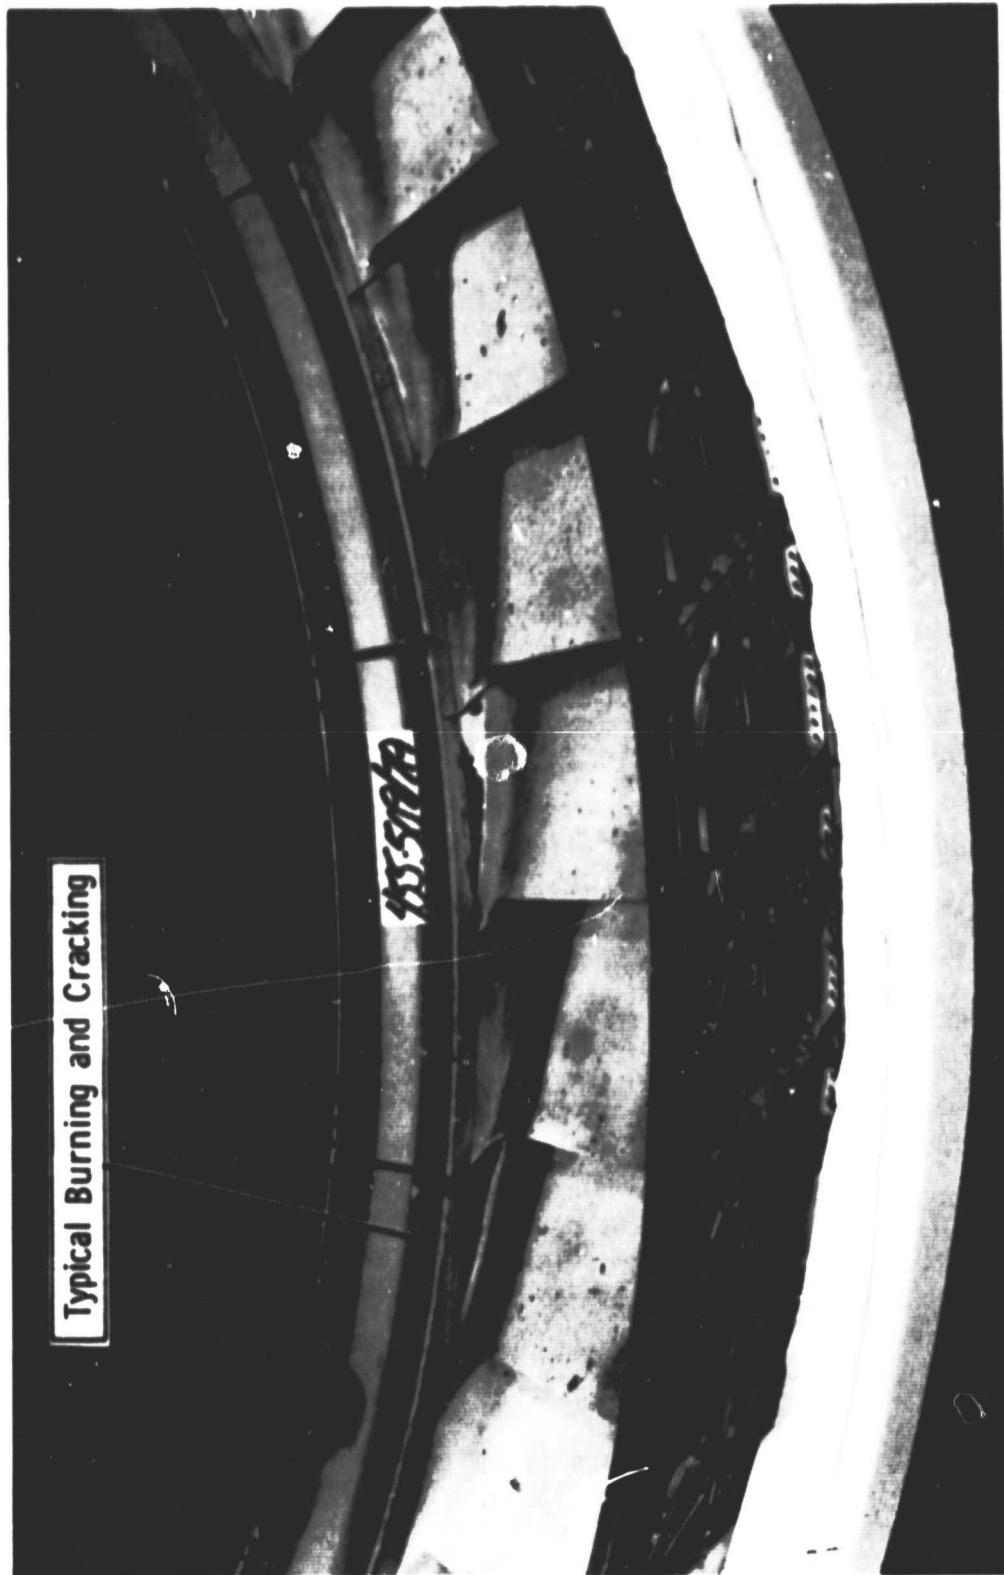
Aft View of Stage 1 Nozzles Showing Inner Platform
